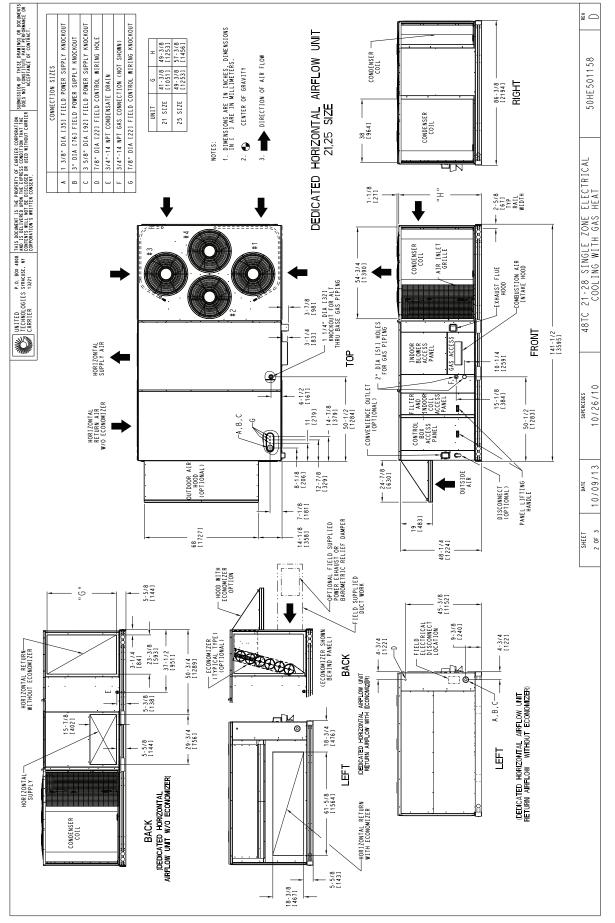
Unit Dimensional Drawing - 21 and 25 Size Units
